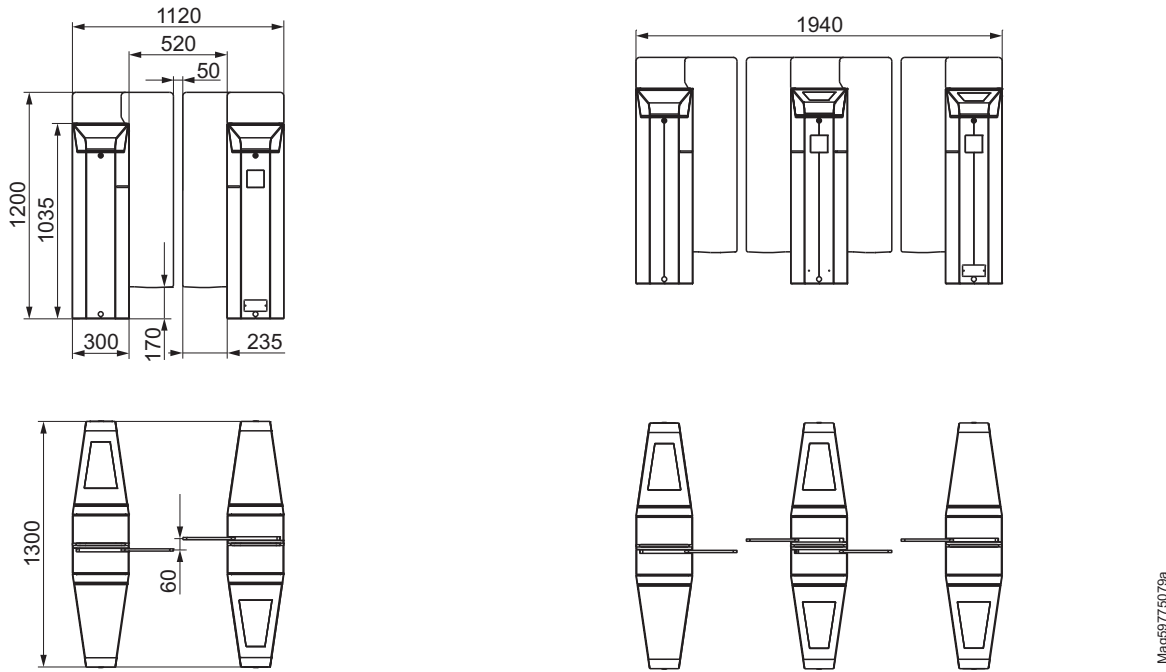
Dimensions – Housing width 300 mm (Standard)
